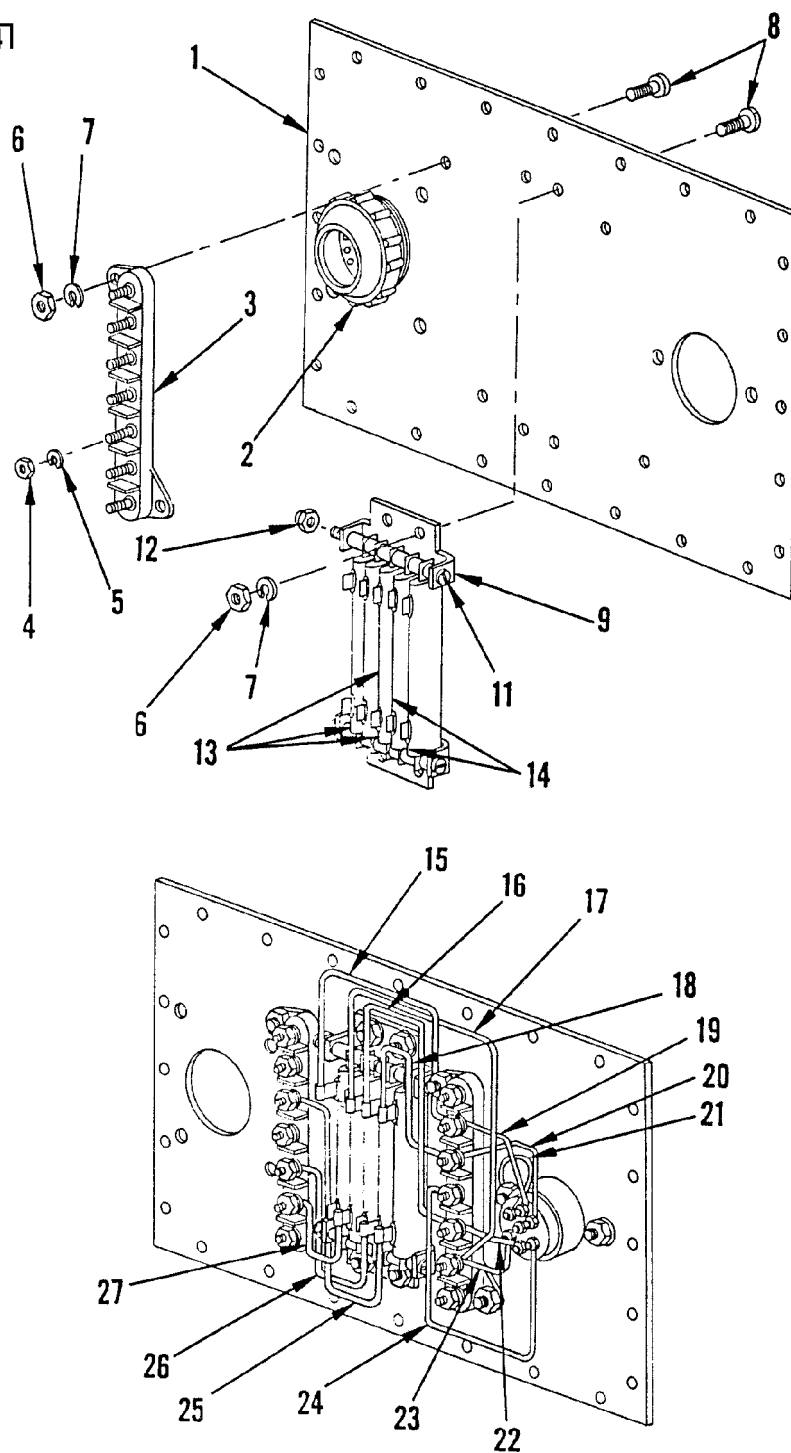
XM1063 Components of Resistor Box and Cover Assembly
